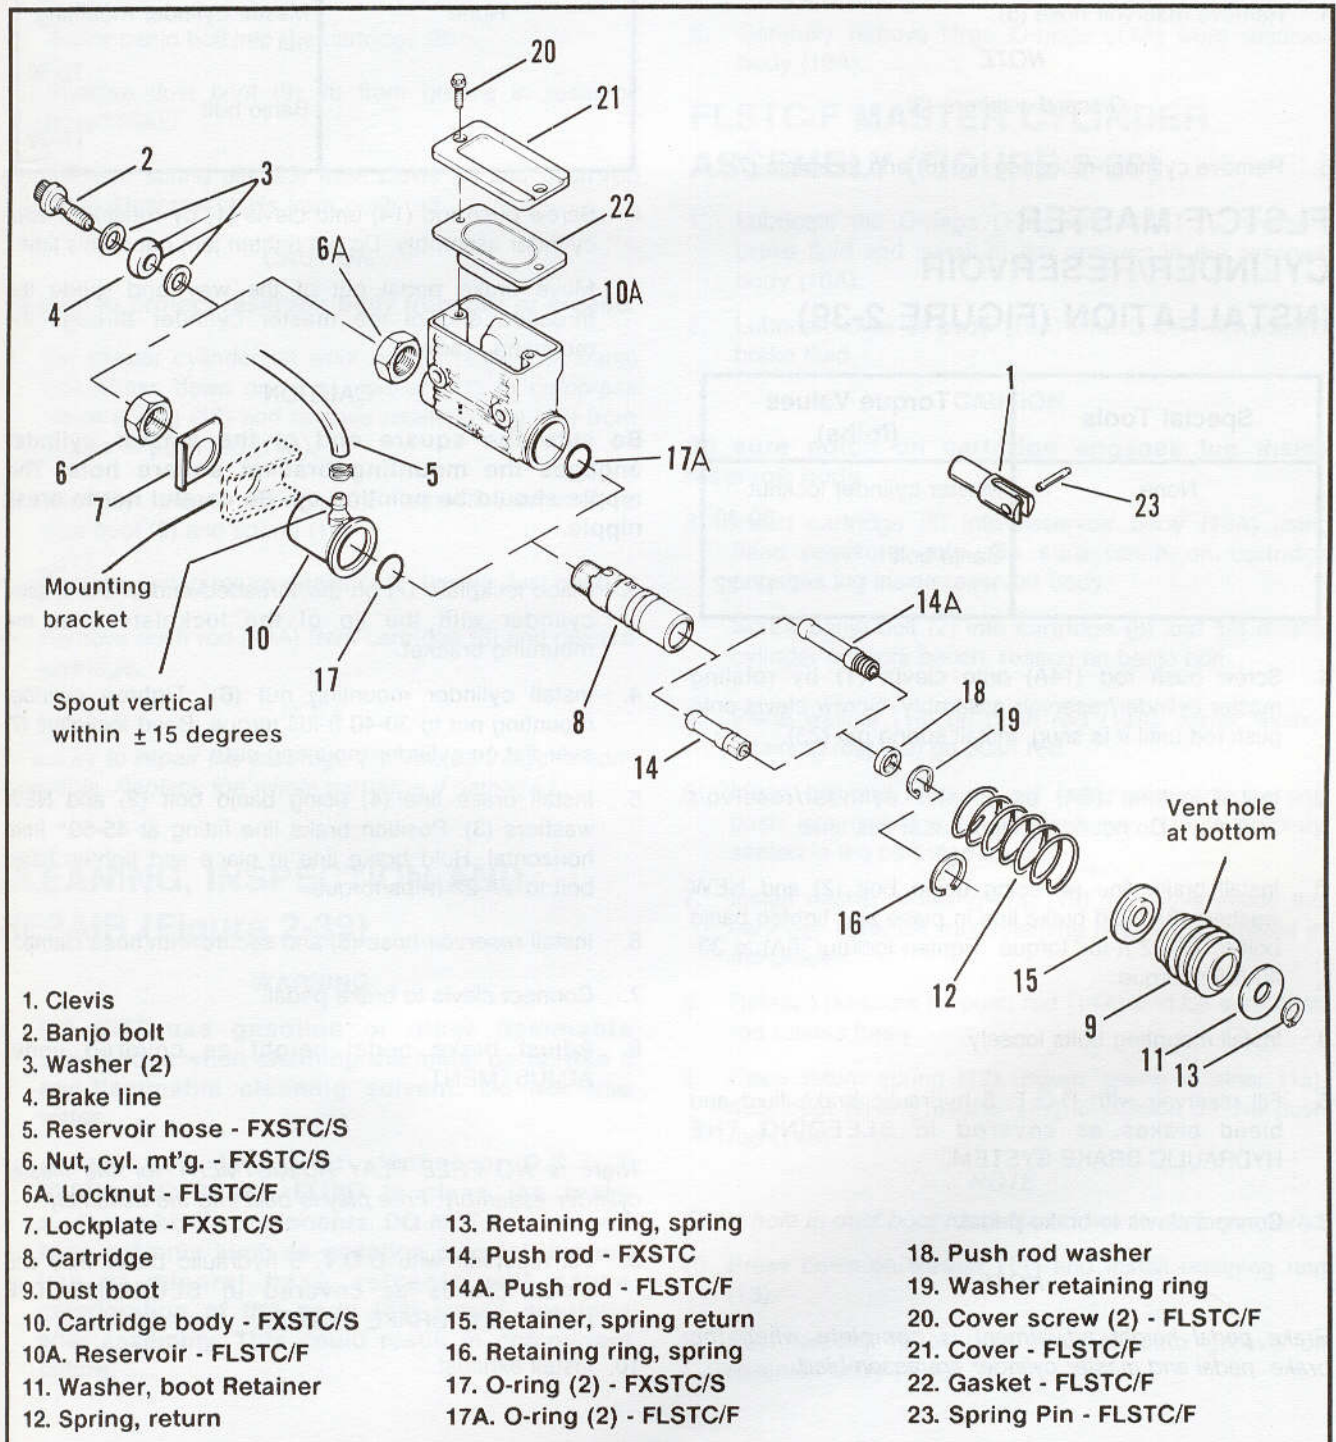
Rear Brake Master Cylinder/Reservoir Assembly
